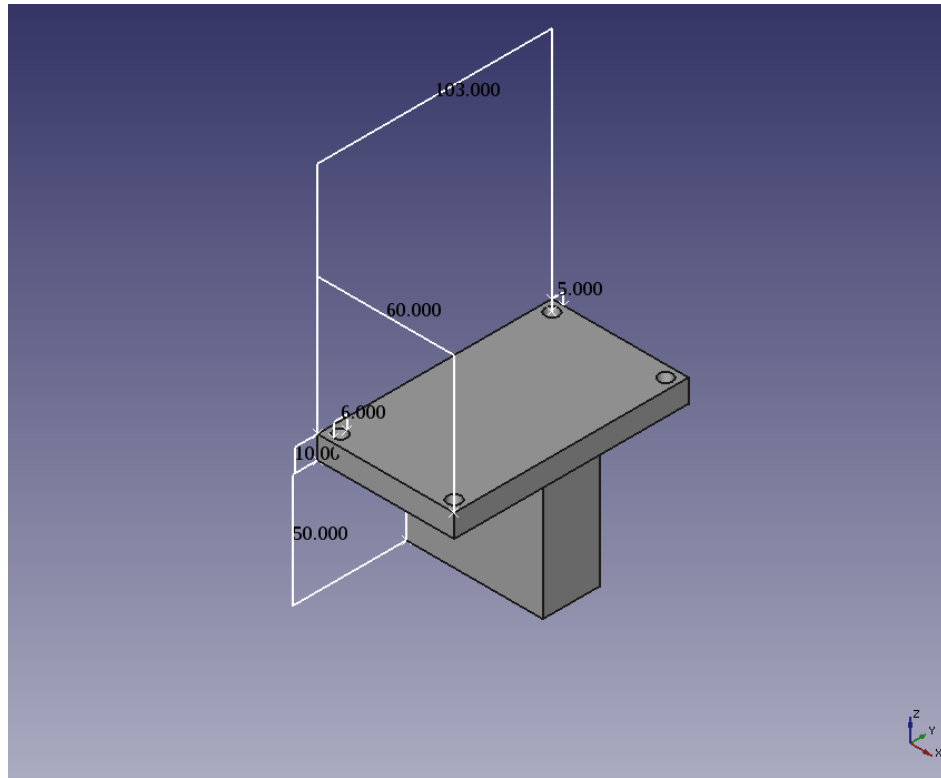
3D Drawing of the camera attachment. All dimensions are millimeter.
